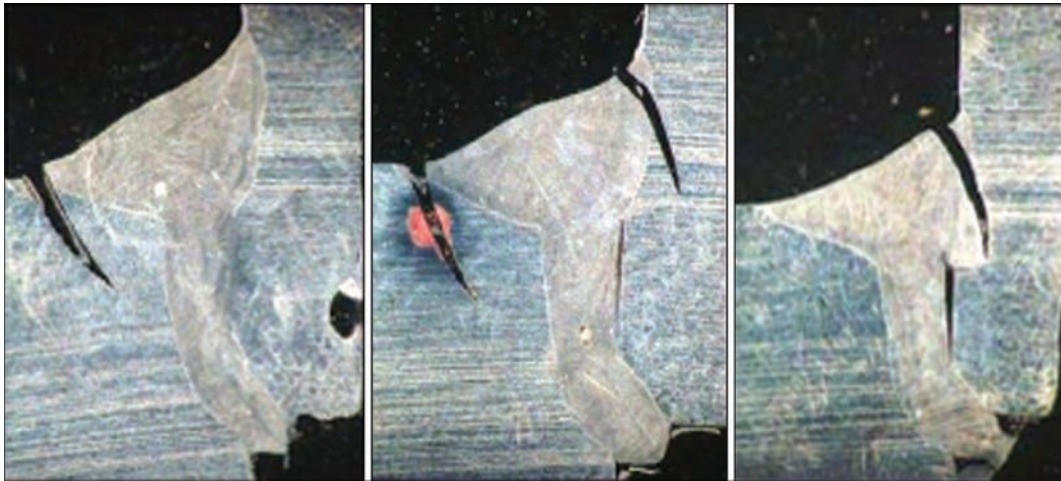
Propagation of longitudinal cracks and fracture of the joint during cyclic fatigue tests. Cross-section of fillet joints of steel SS2333, welded using laser-arc method [9]
